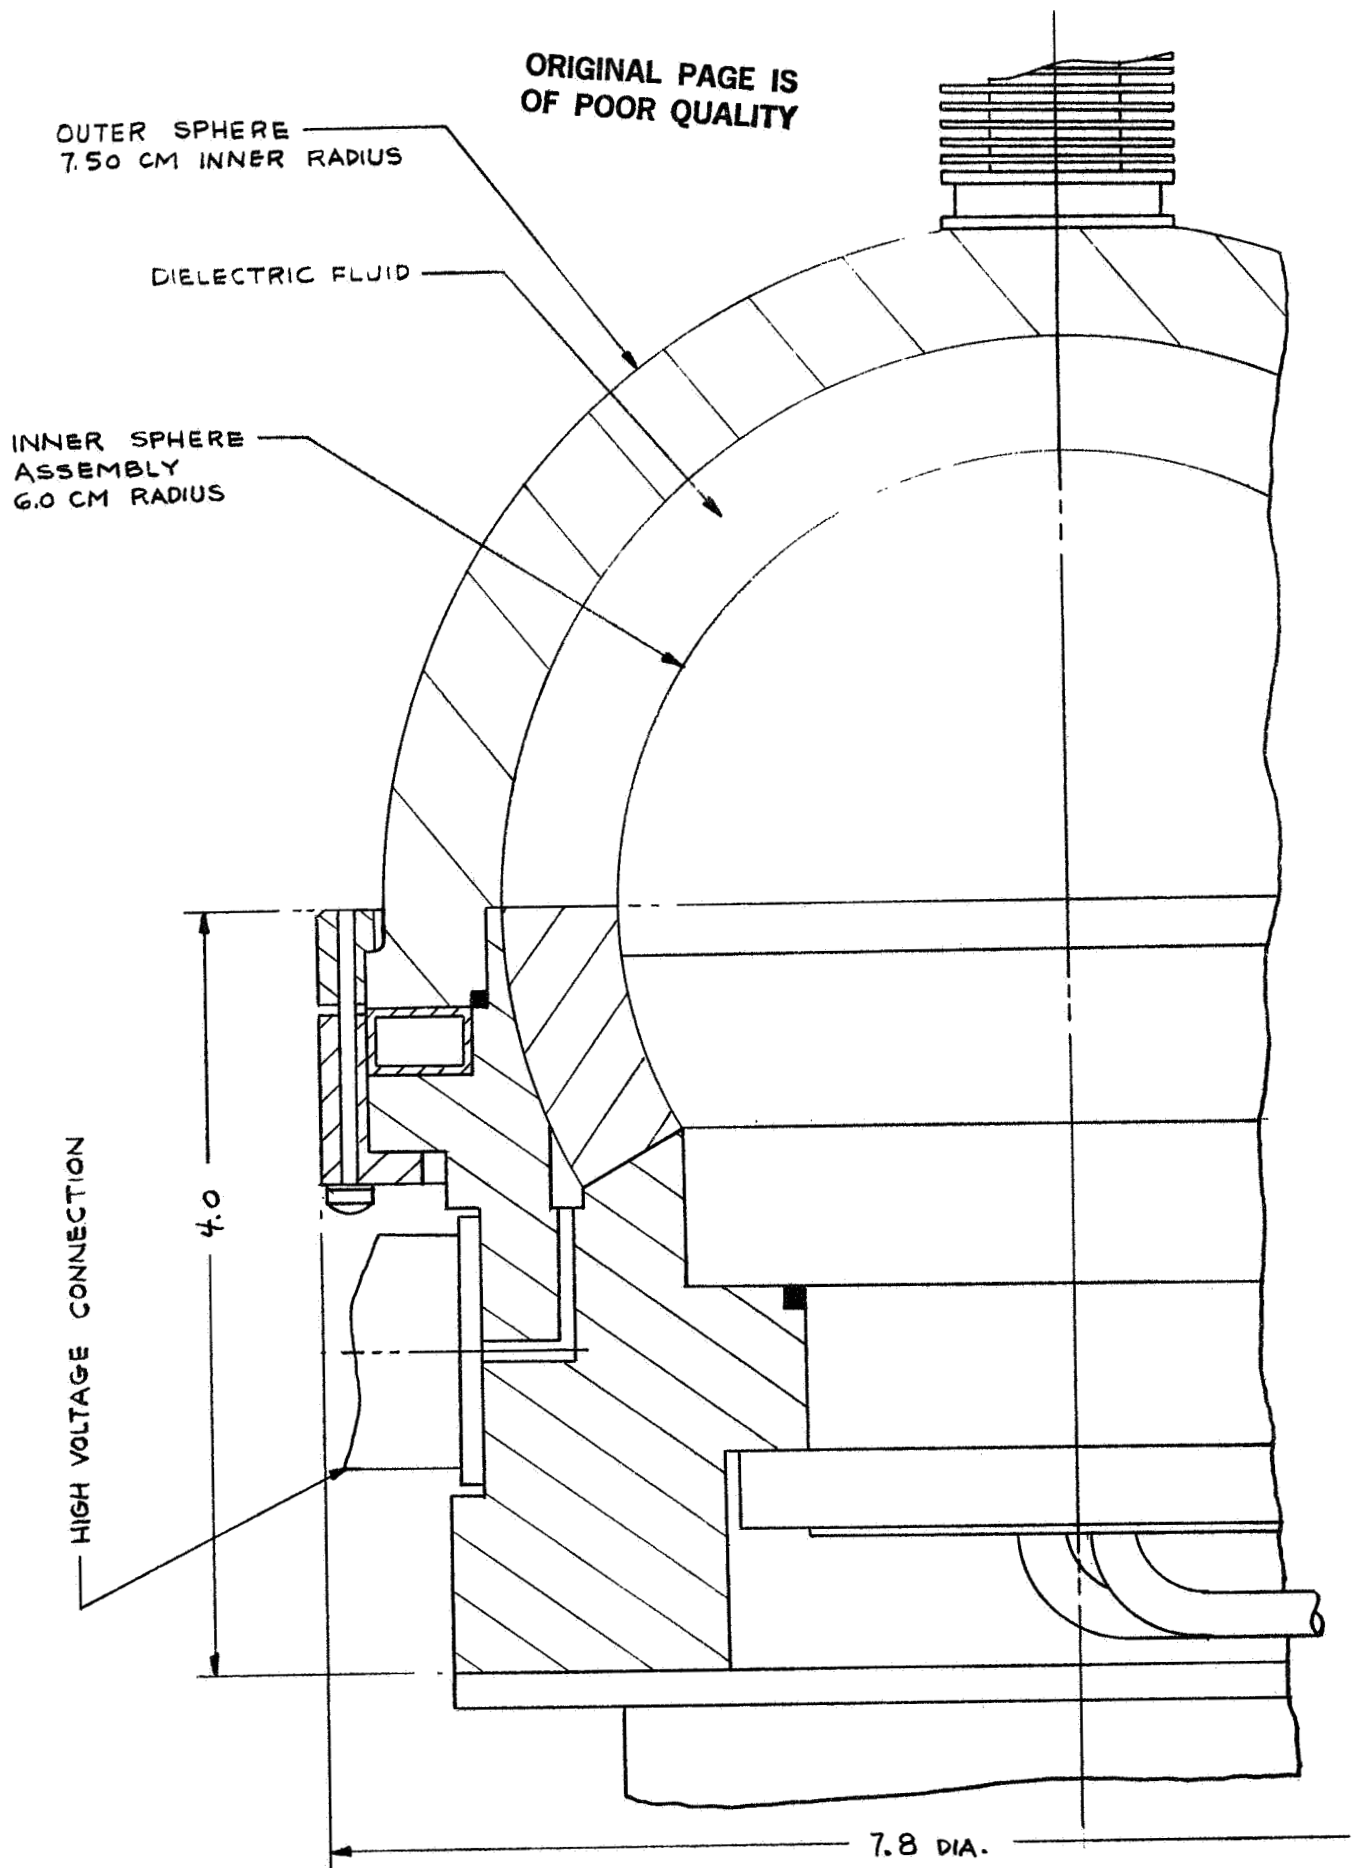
7.5 CM FLOW CELL ASSEMBLY (DIMENSIONS IN INCHES)
